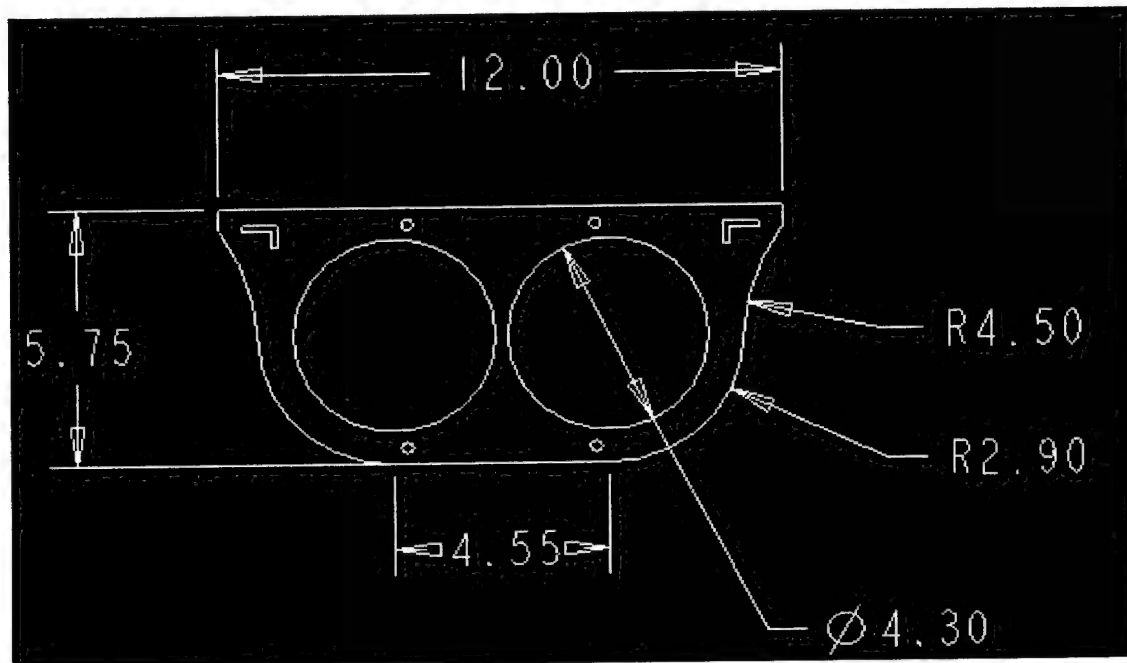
Bulkhead Dimensioned Piece (In Inches)
